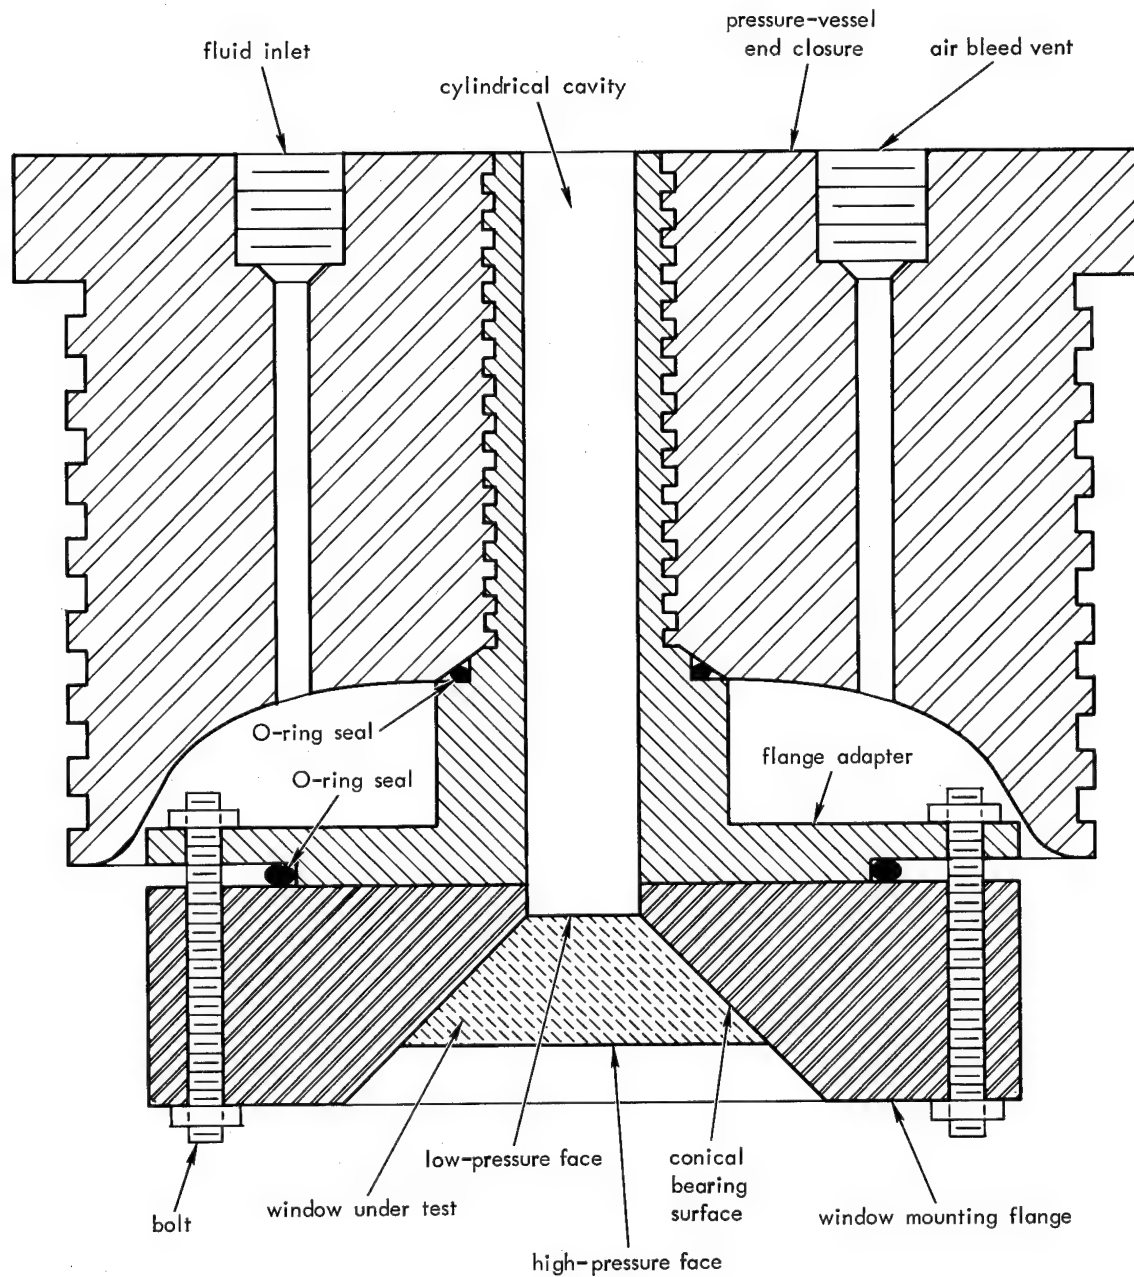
Flange adapter attached to DOL Type I mounting flange, with mounting assembly positioned in end closure of pressure vessel.
